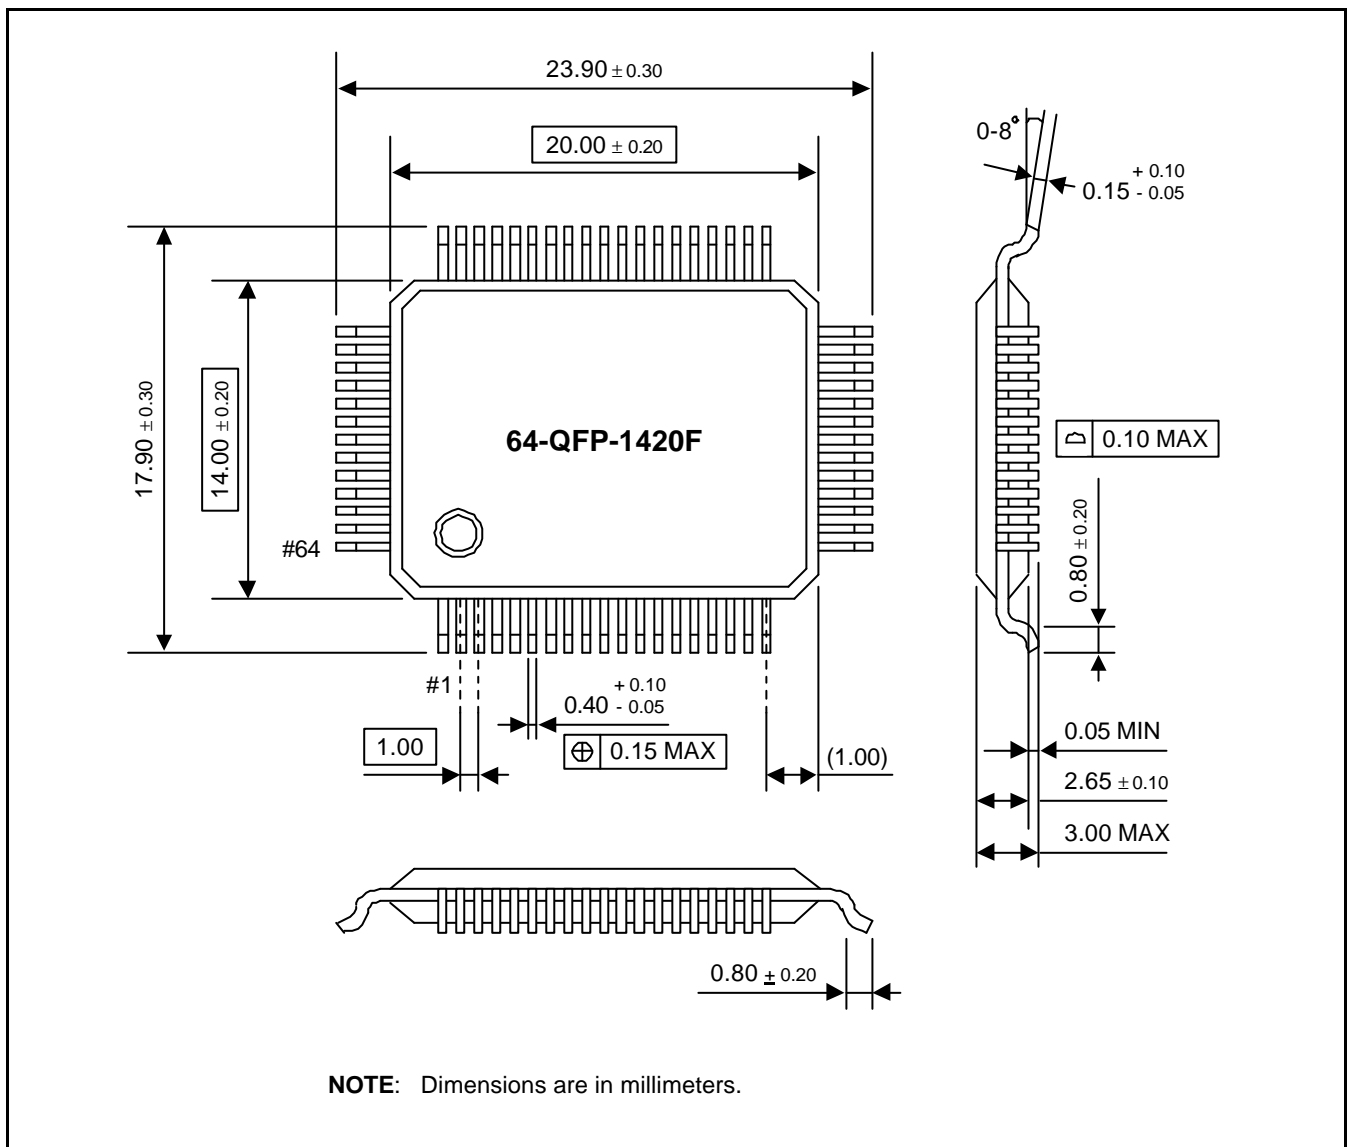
64-Pin QFP Package Dimensions (64-QFP-1420F)
